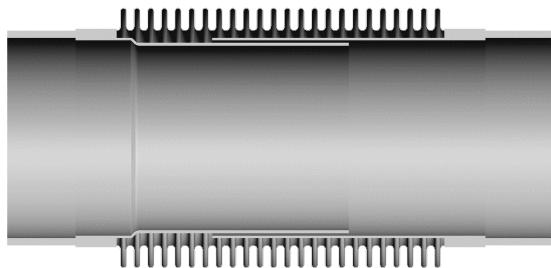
Typical hydroformed bellows design (cross section).
